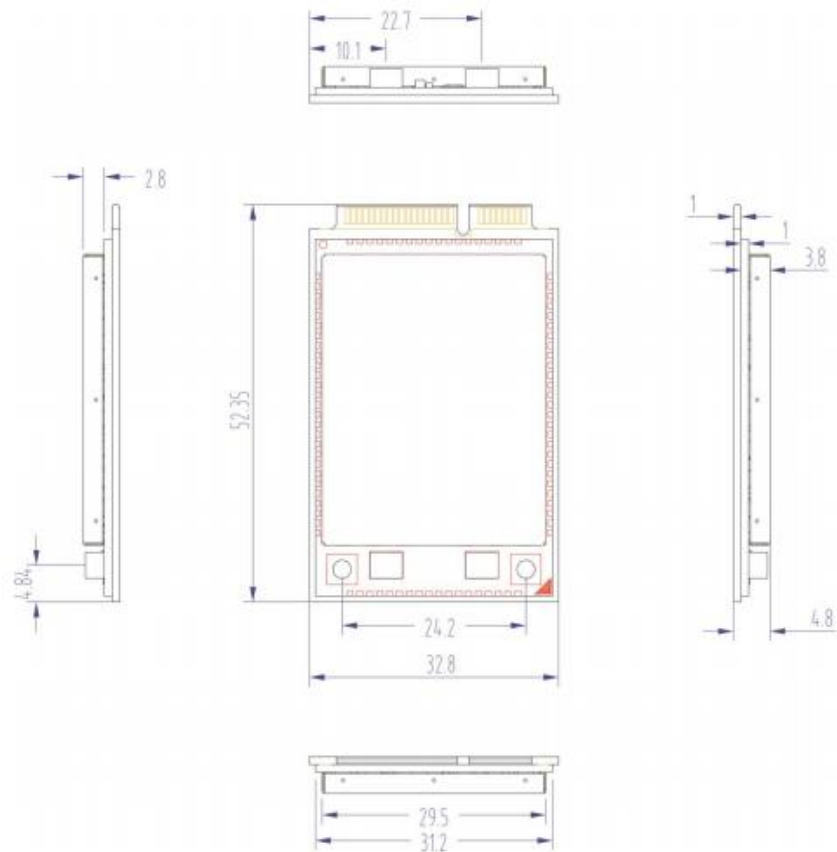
GDM7243ST Wireless module outline drawing (Unit: mm)
